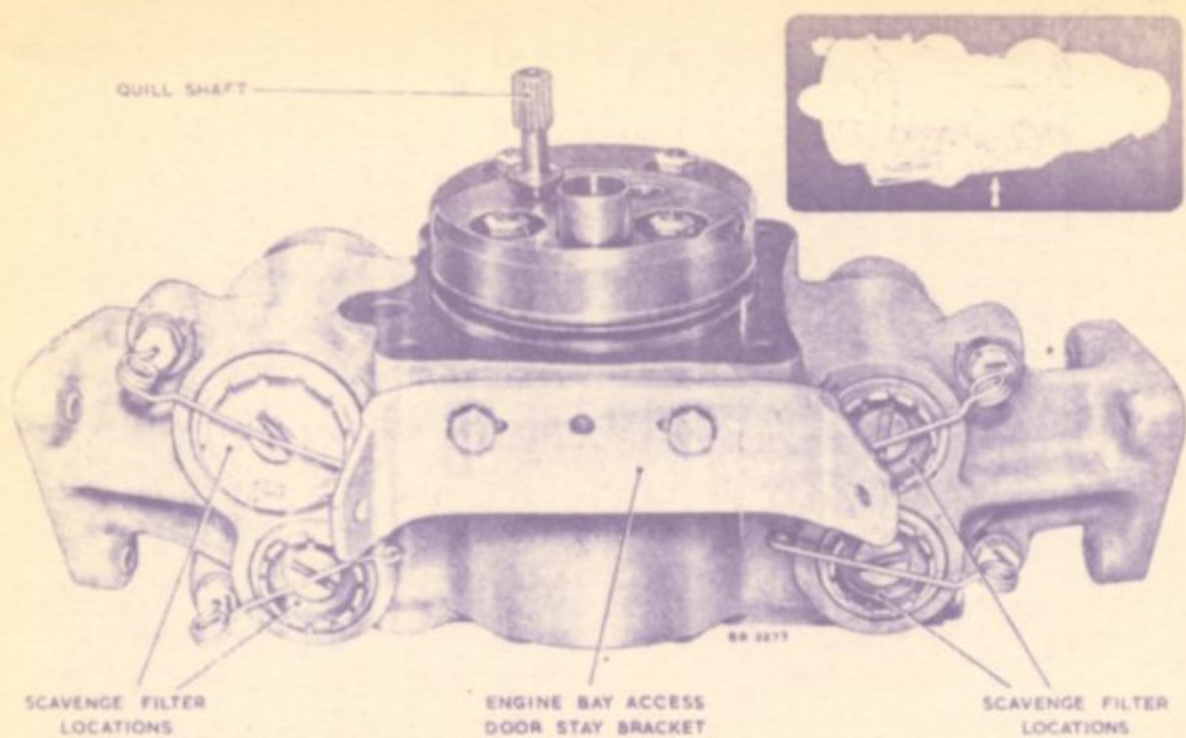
Auxiliary scavenge oil pump unit—bottom view
